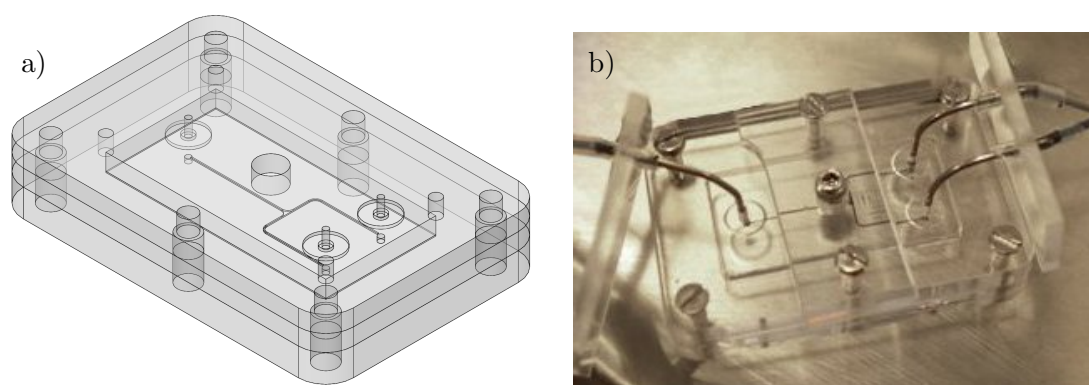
Panel 'a' shows a 3D model of the PDMS mould. The mould consists of three layers. The lower part defines the channel extrusions and the upper part defines the O-rings. Panel 'b' shows a picture of the pinch valve prototype. The channels are filled with black ink for illustrative purposes
